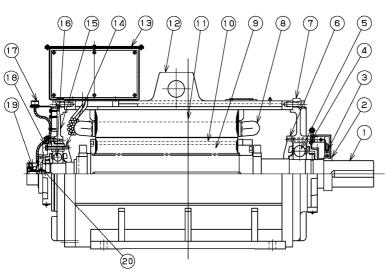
Structural sectioned drawing of EDM54W to EDM6851W
